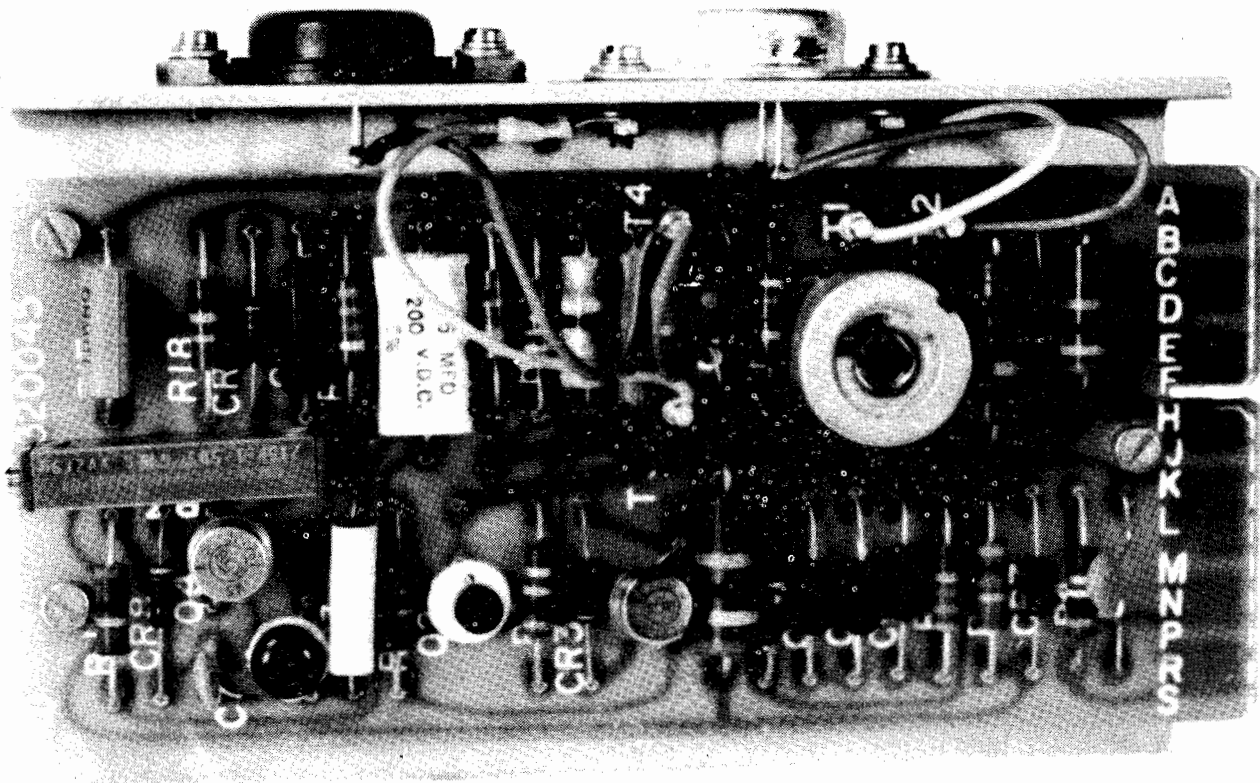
Clutch Magnet Driver (CMD) 321991
